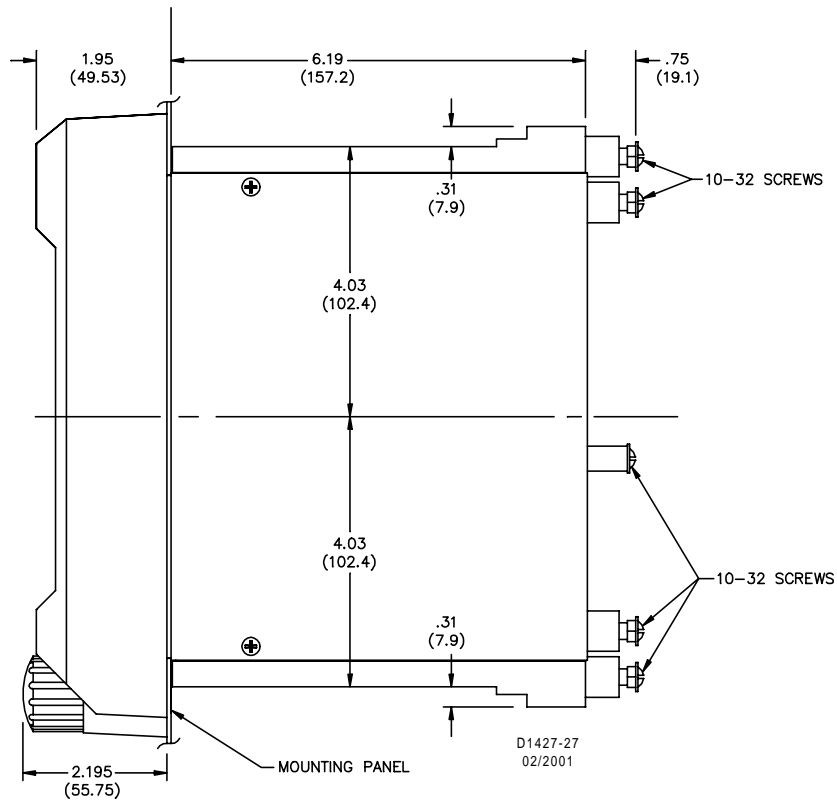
S1 Case, Double-Ended, Semi-Flush Mounting, Outline Dimensions, Side View
